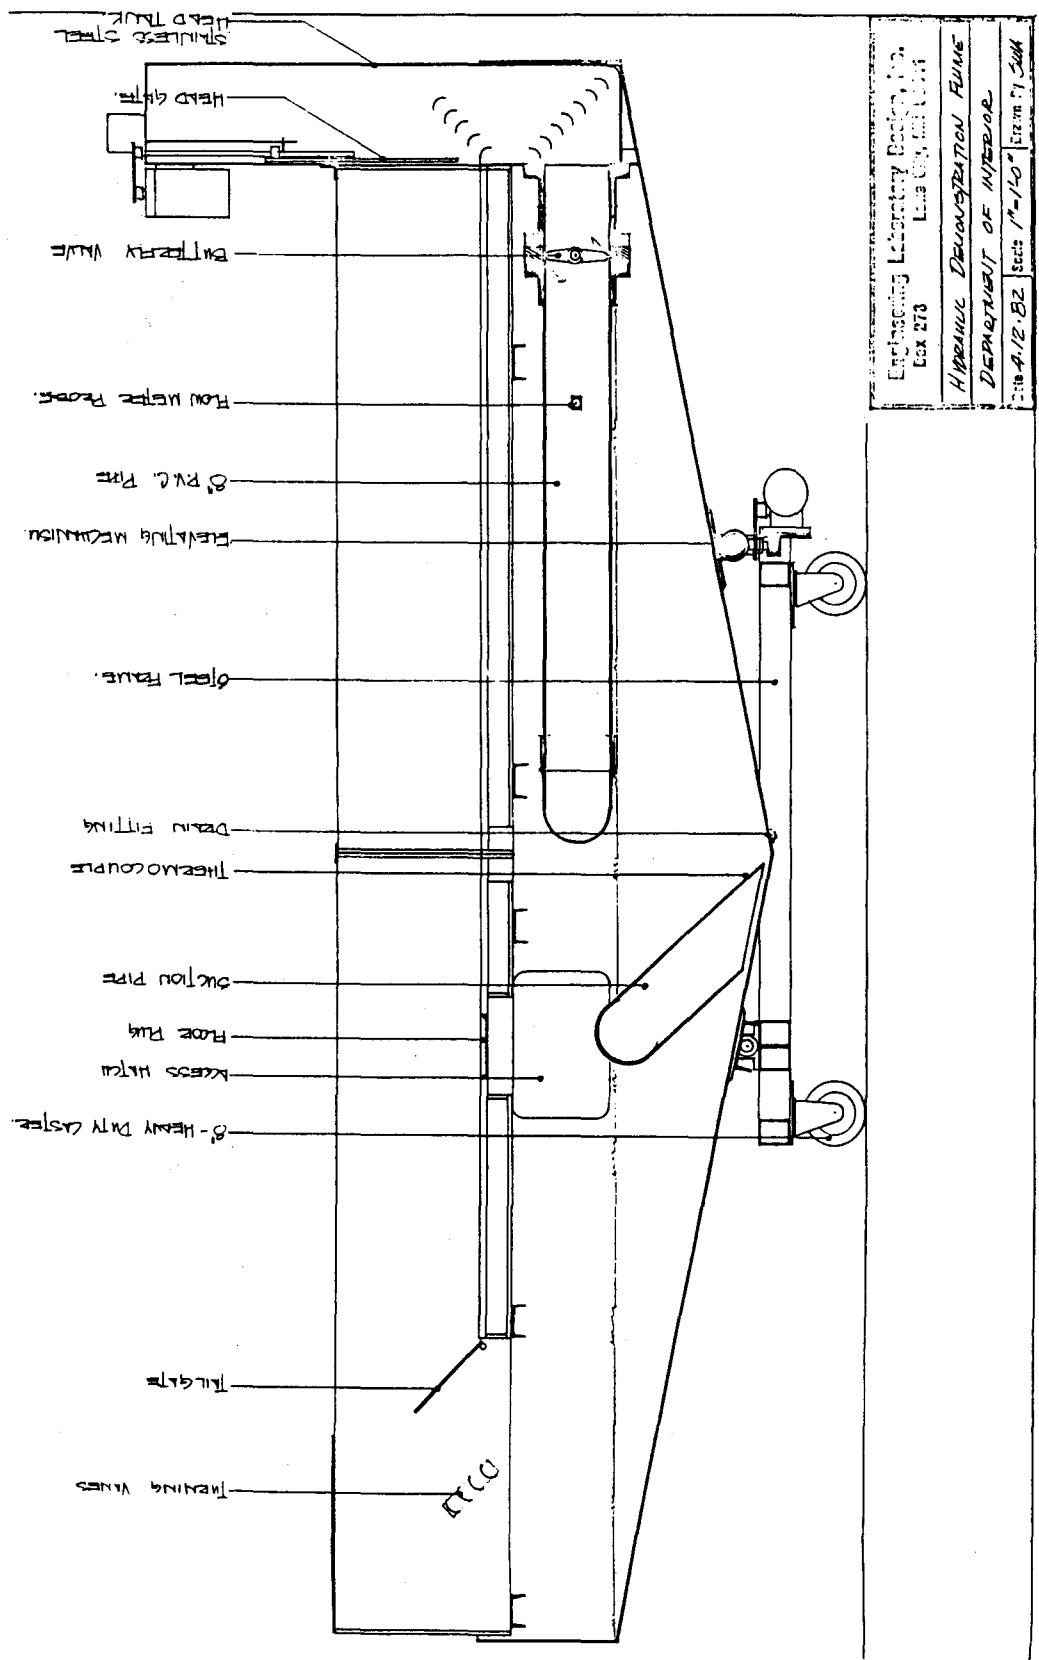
Hydraulic Demonstration Flume Drawing by Engineering Laboratory Design, Inc. (sheet 2 of 3).
